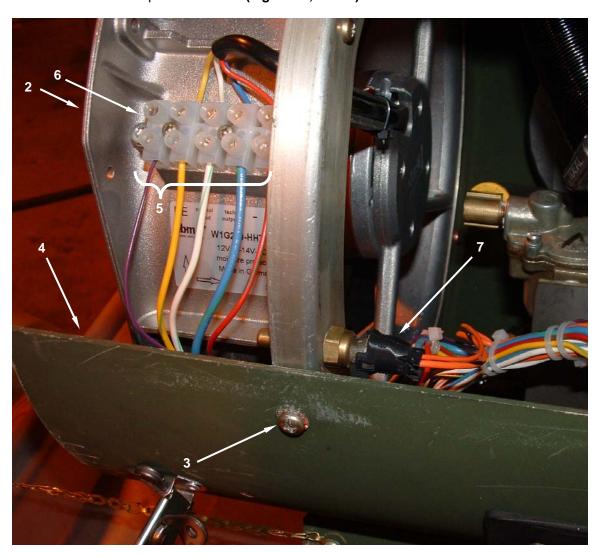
Replace the Electronic Box Assembly, Complete With Wire Harness – Install the Heated Air Blower.
